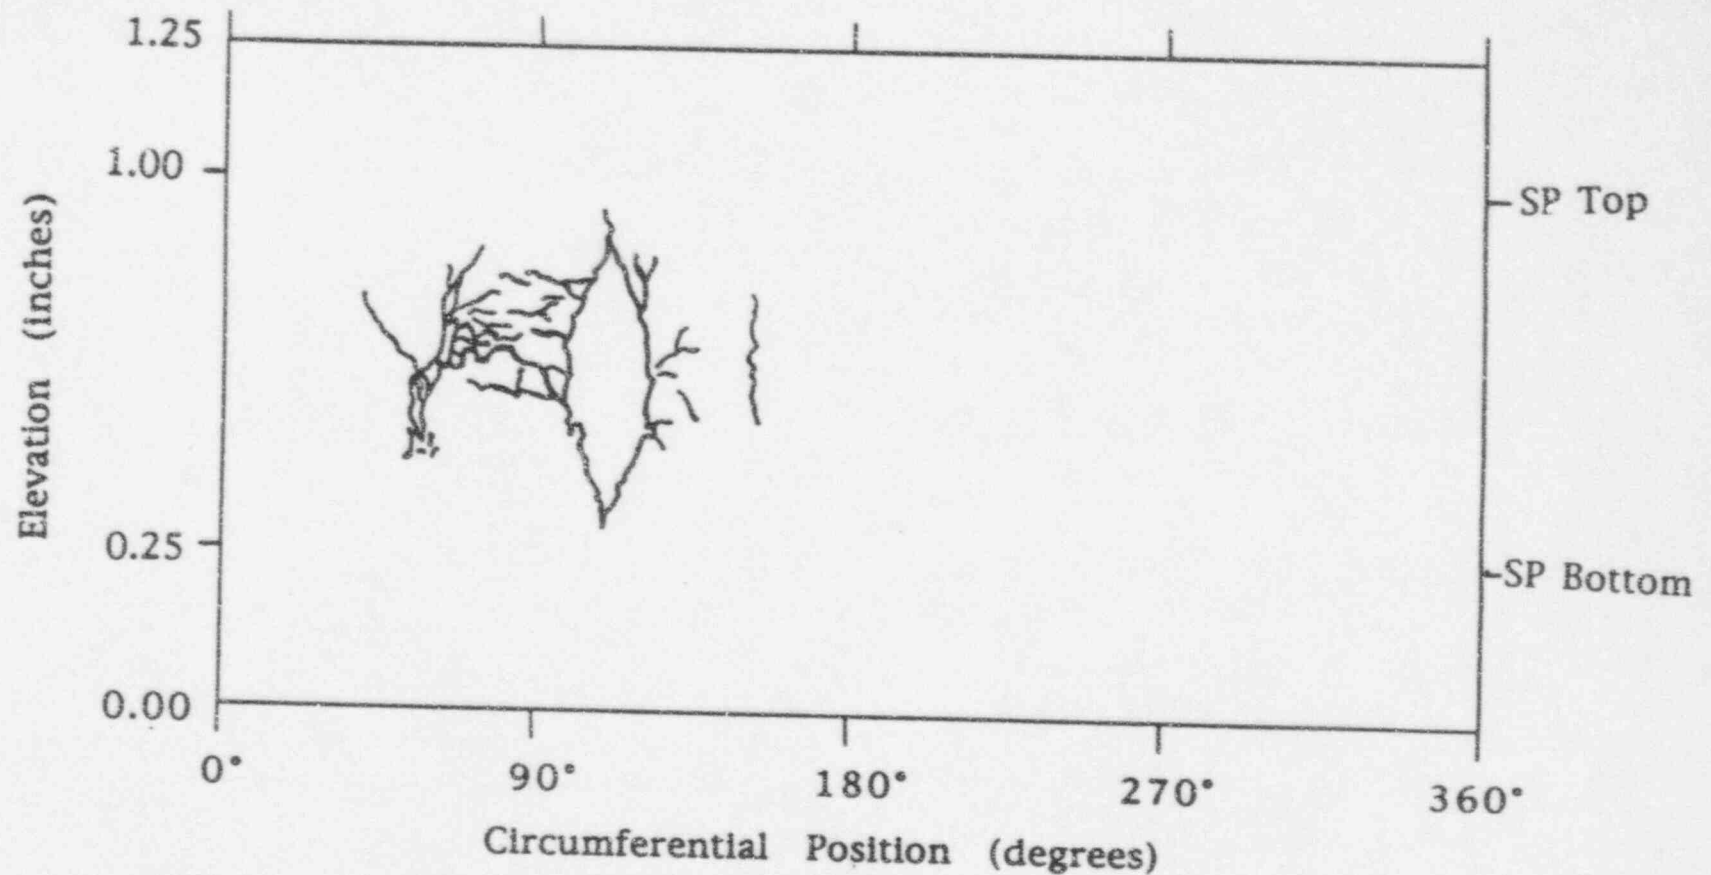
Sketch of the OD surface crack distribution found at the third tube support plate (TSP3) region of Tube R20-C7. Also shown are the locations of the burst fracture openings which occurred at circumferential positions of 45° and 110°. The corrosion cracking and the burst fractures were confined to the crevice region.
